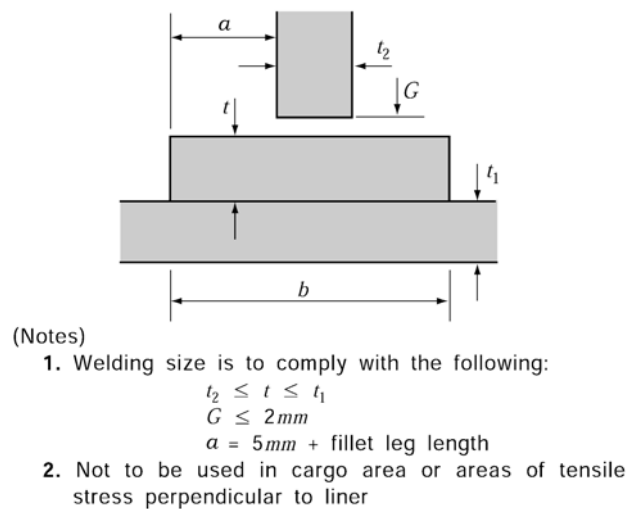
Fillet Welding inserting a Liner
